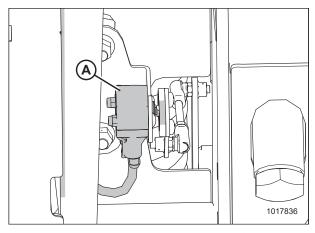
Optional Two-Sensor Kit - Right Sensor
